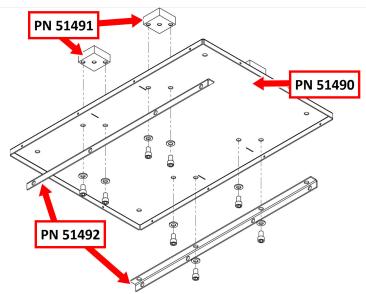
Top cover stiffener, top cover, and top cover blocks assembly.
